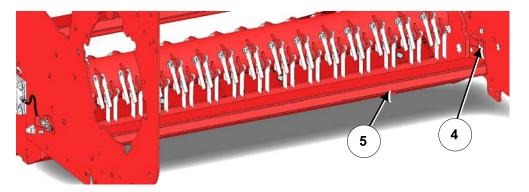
Install the Filler Panel near the Feed Chopper (Flail Drum not shown for Clarity)
